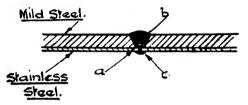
METHOD OF WELDING STAINLESS STEEL-CLAD PLATES
